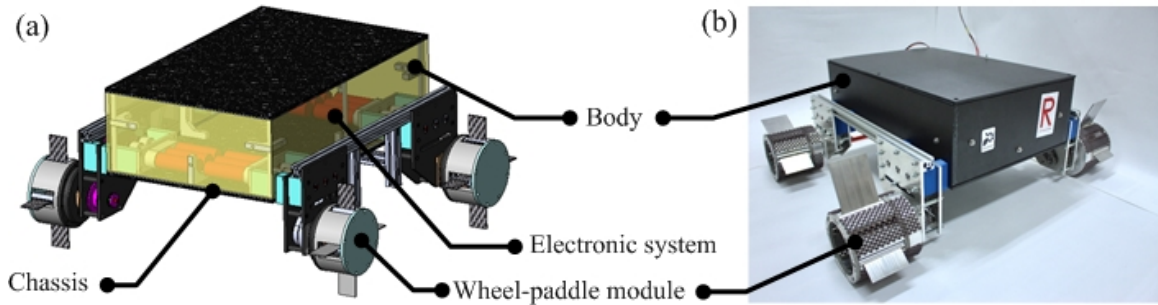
Prototype of the wheel-paddle integrated robot: (a) 3-D model; (b) picture.
